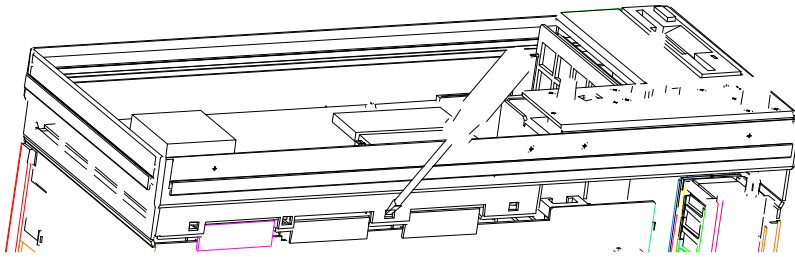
Removing the front module controller Installing the new front module controller and putting the instrument back together.
